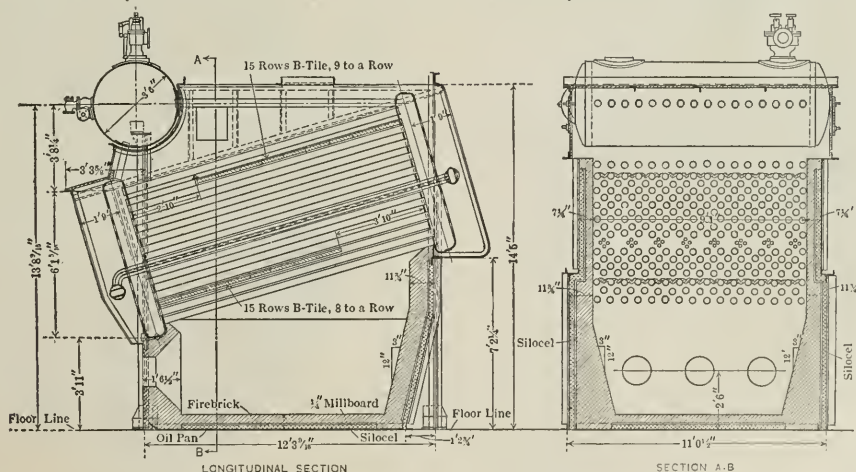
SETTING FOR HEINE BOILER BUILT FOR THE EMERGENCY FLEET CORPORATION
